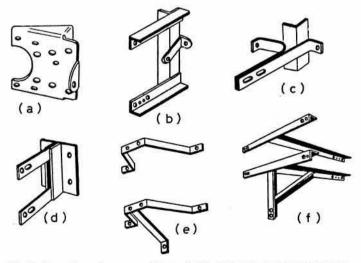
Examples of commercially-available chimney and wall-mounting brackets used for broadcast receiving antennas as noted in BS6330:1983. (a) Pressed steel chimney bracket; (b) welded chimney bracket; (c) double chimney lashing bracket (used in pairs); (d) welded wall bracket; (e) two-plece welded wall bracket; (f) T and K welded wall brackets. Note that such brackets are not intended to support the weight and strain of very large rotating 70MHz or 144MHz arrays. Guidance as to what the brackets will support is given in BS6330
